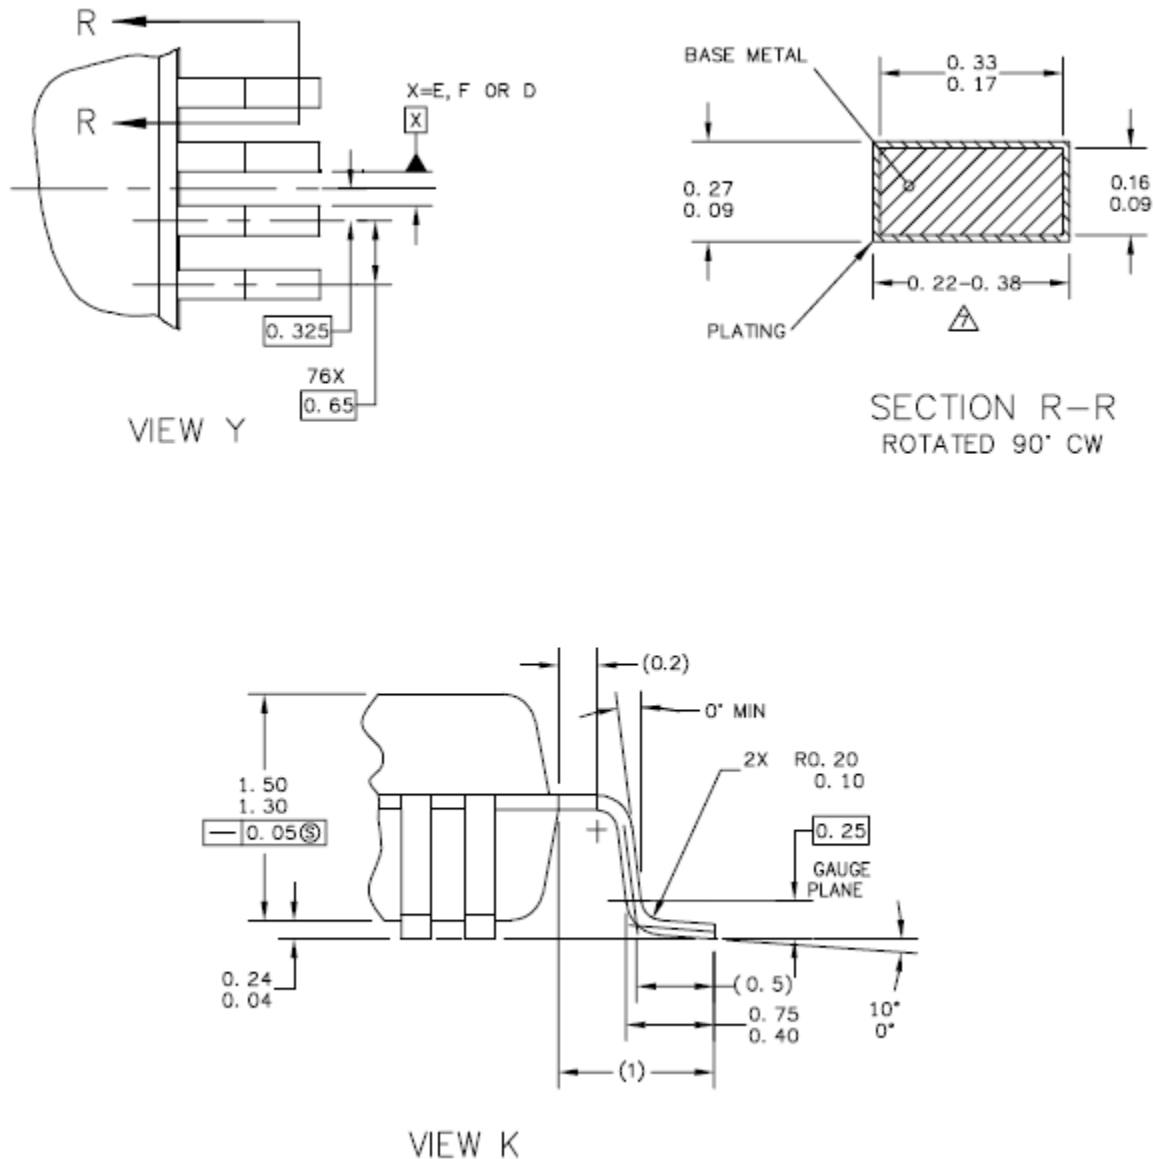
80-Pin Package Outline Drawing (2 of 2)
